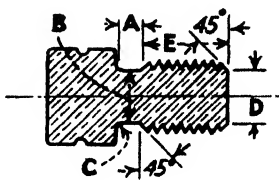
When threading to a shoulder, a recess having a width *A* usually at least $2\frac{1}{2}$ threads and a diameter *B* about 0.010 in. smaller than the root of the thread is desirable, as are also 45-deg. chamfers at both ends of the thread. The length of full thread, *E*, should always be indicated, as well as the pitch and form of thread and class of fit necessary. At least a small radius should be provided at *C*, where the recess and shoulder join, and the shoulder preferably should make an angle of 1 to 3 deg. minimum with the plane normal to the axis.
